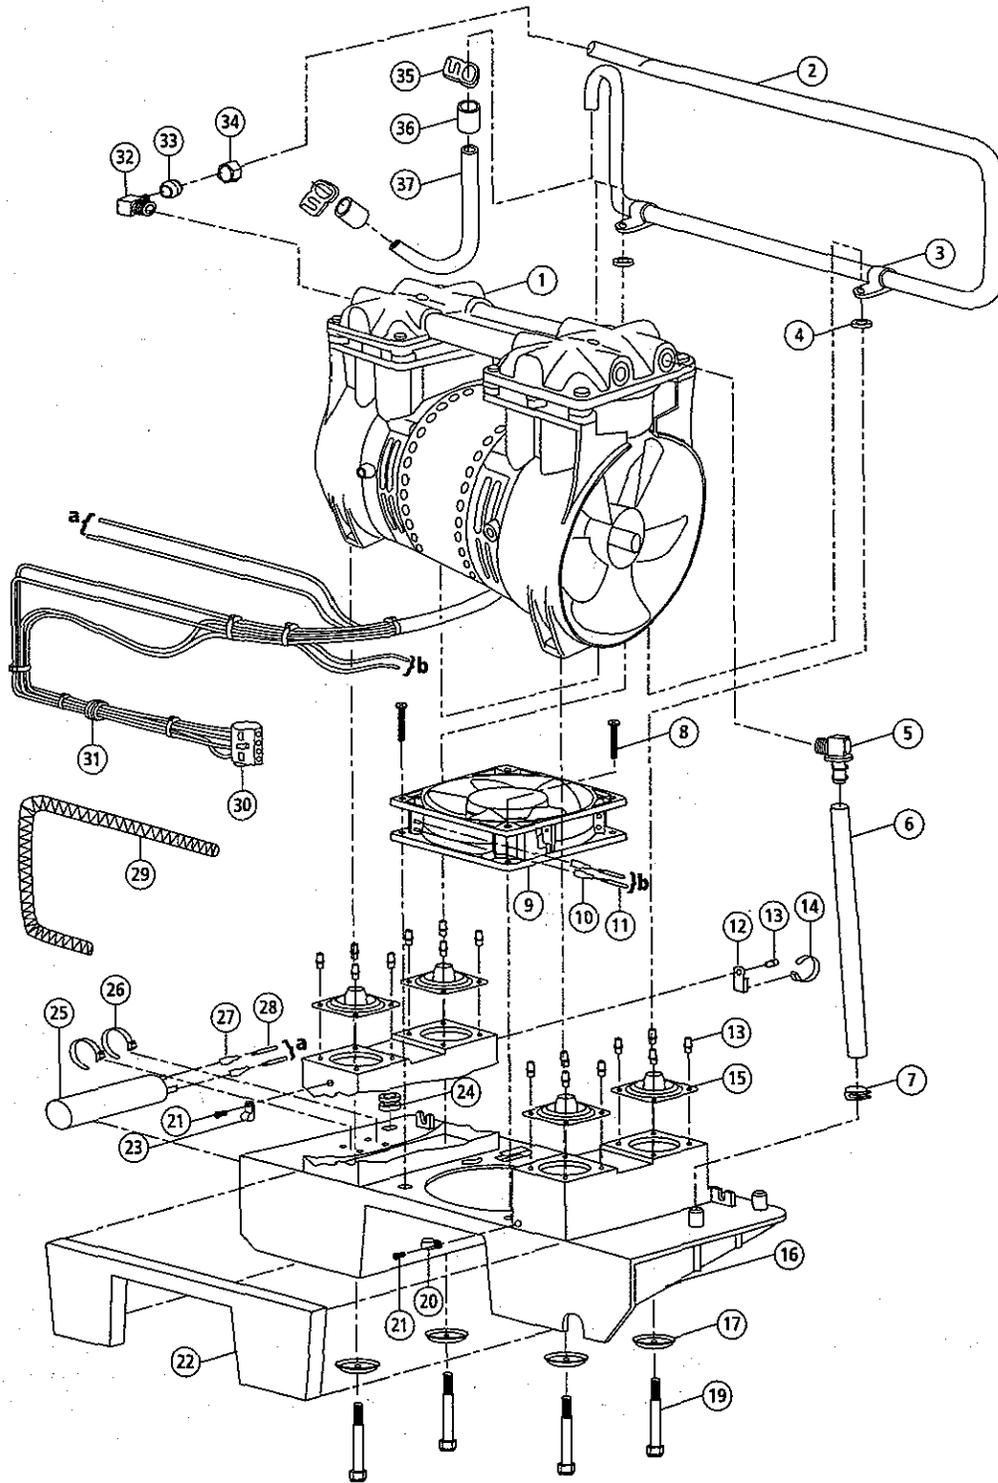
2650 Thomas Compressor Platform Assembly
